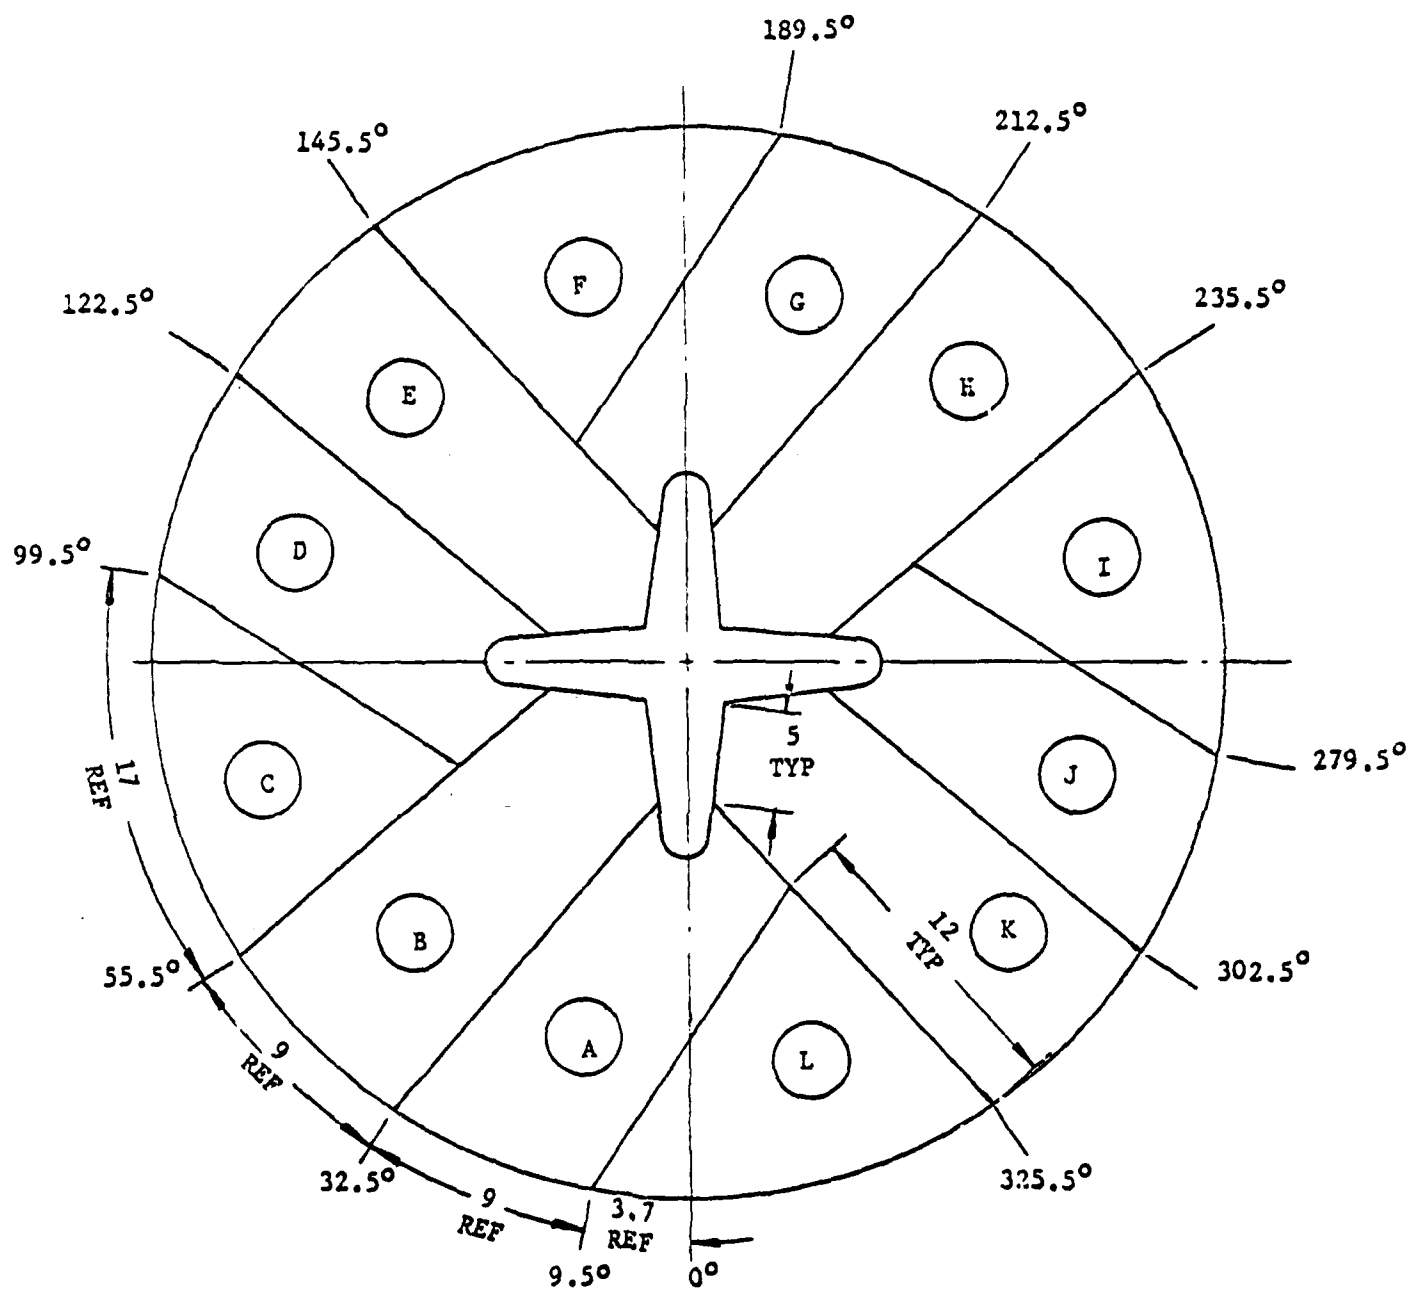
Section 3 and 4 Segment Layout and Letter Identification
